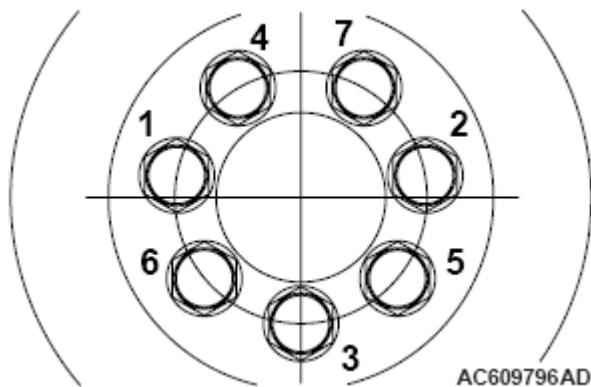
Identifying Tightening Sequence Of Drive Plate Bolts
